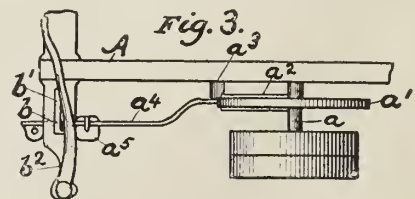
is a front elevation of a part of one end of a loom, showing the mechanism necessary to enable the novelty of the new device to be understood; Fig. 2 is a right-hand end elevation of the parts shown in Fig. 1; Fig. 3 is a top or plan view of the parts shown in Fig. 2; Fig. 4 is a detail showing the controlling member, Fig. 1, on an enlarged scale; and Fig. 5 is a sectional detail to be referred to.
